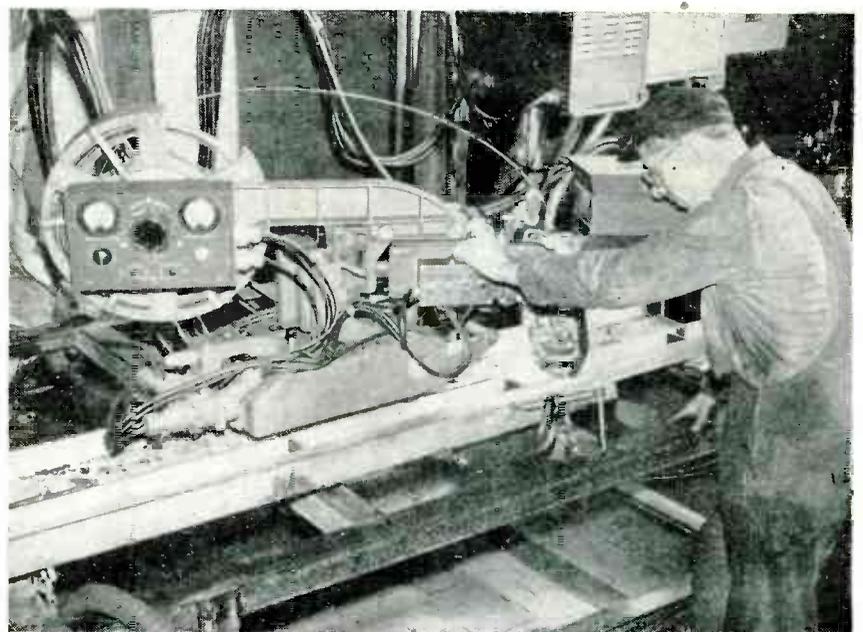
Seam welder controls are mounted on carriage and connected by cable with electronic equipment in box over operator's head
